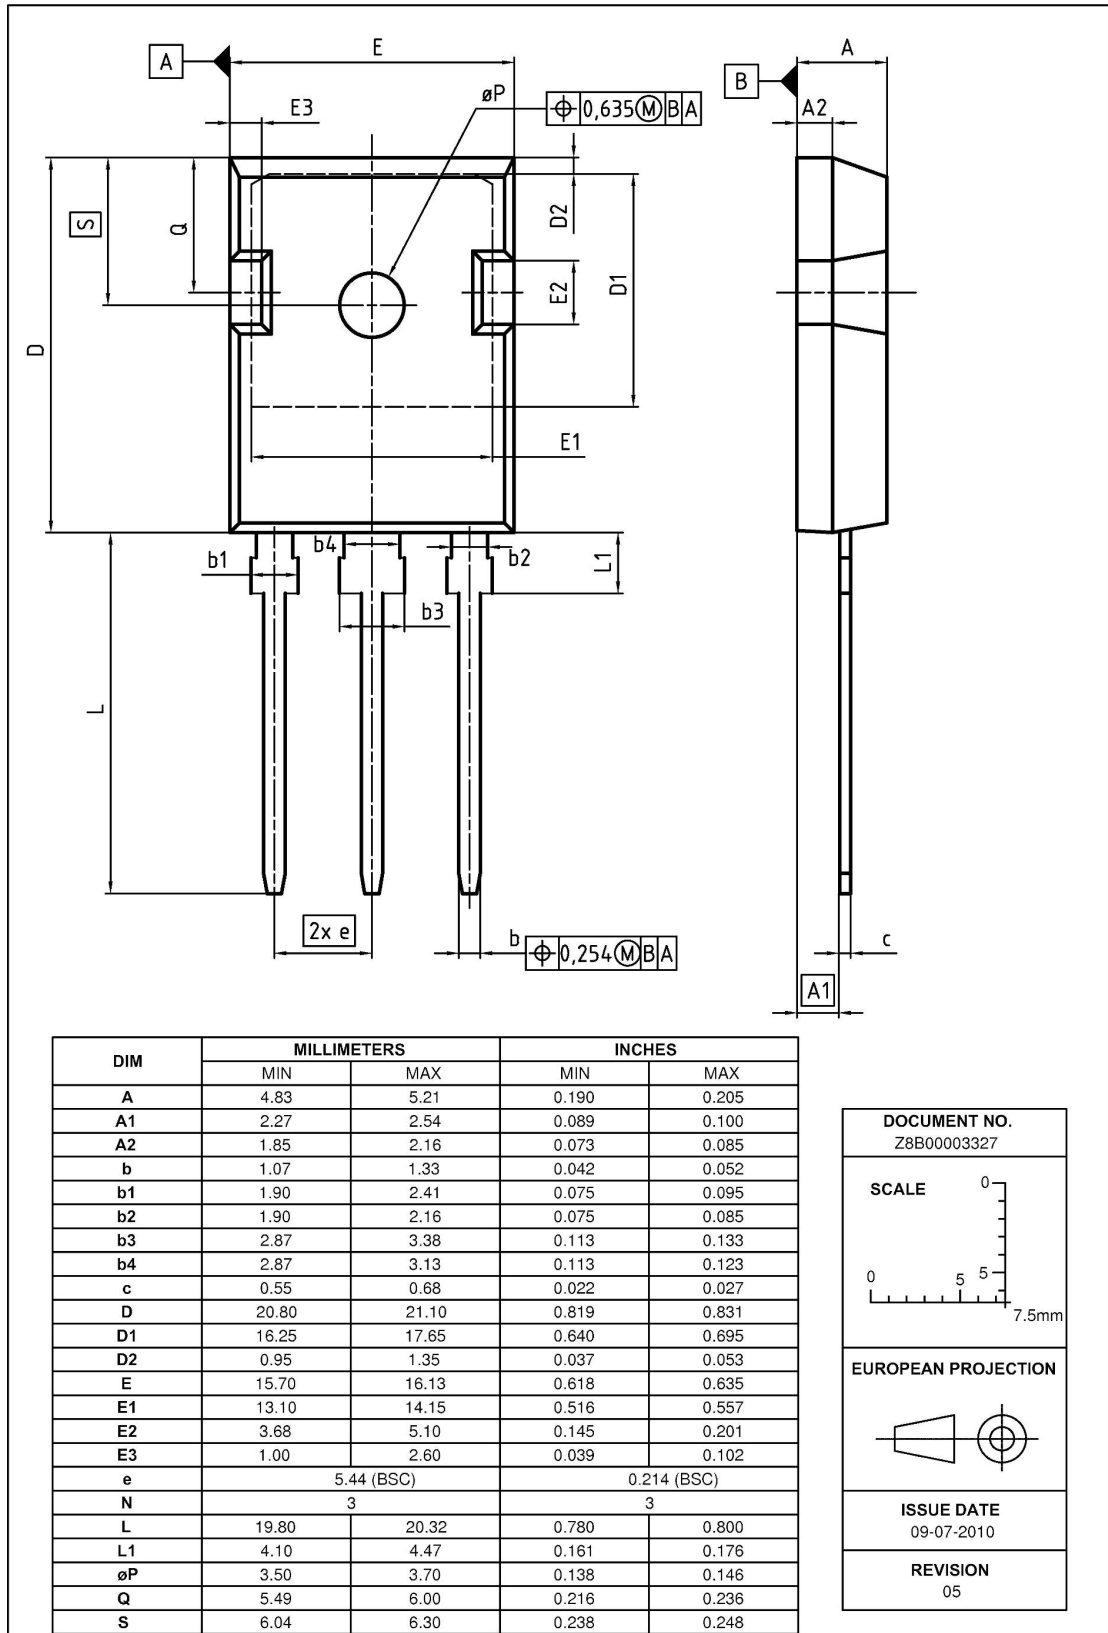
Outline PG-TO 247, dimensions in mm/inches
